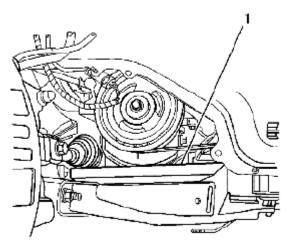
Identifying Lower Ball Joints And Steering Knuckles Courtesy of SUZUKI OF AMERICA CORP.
